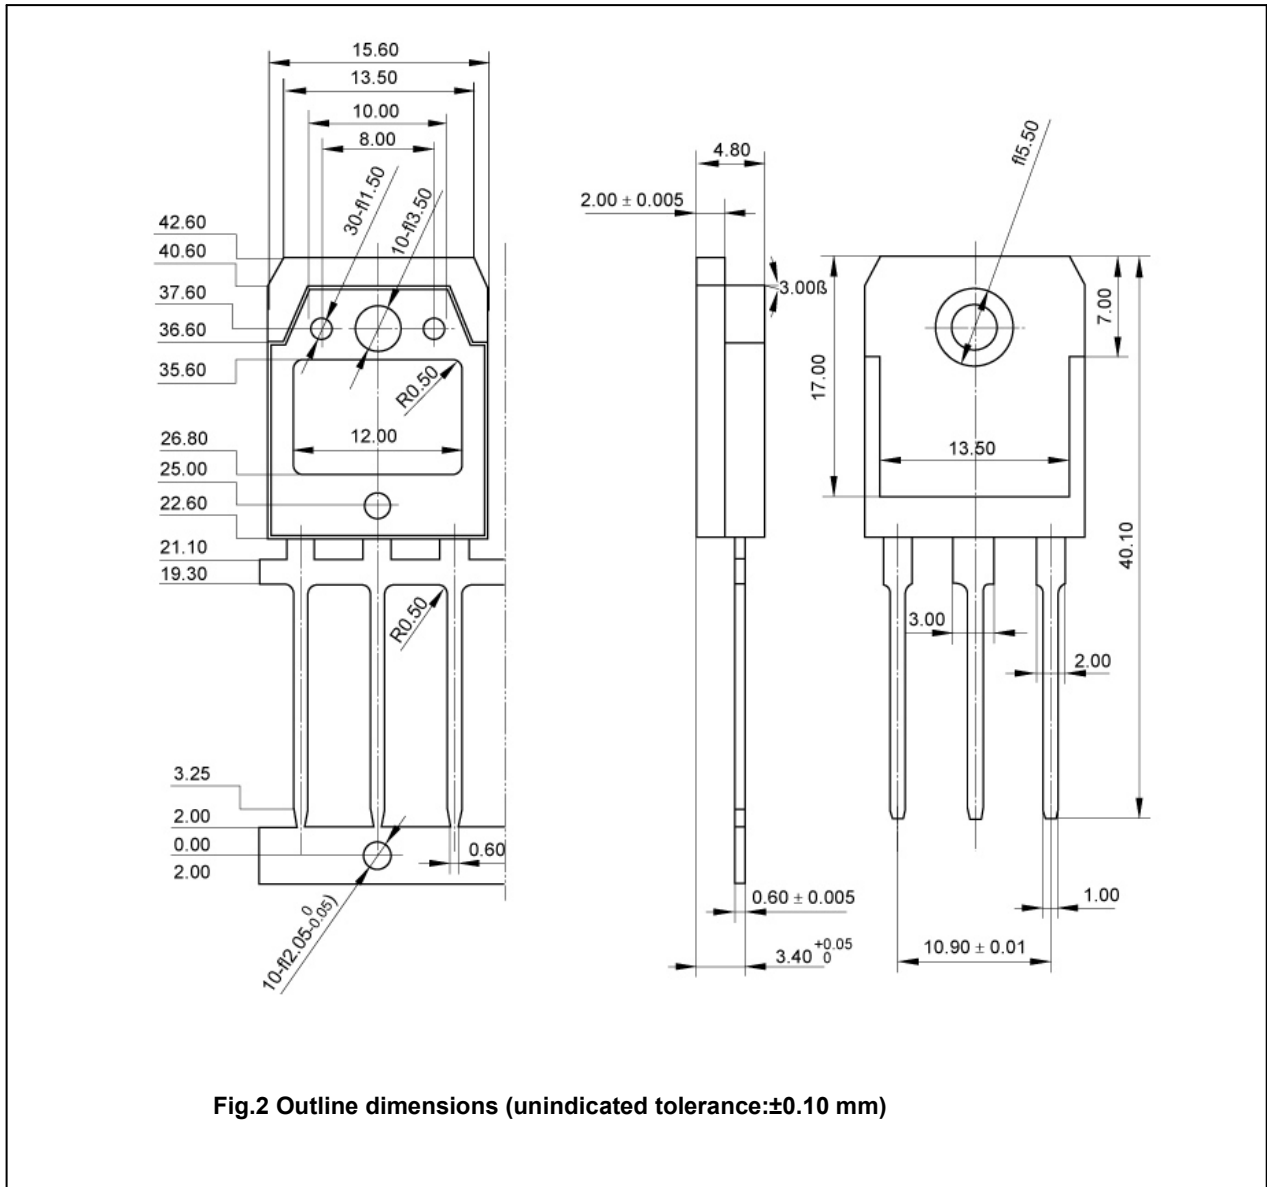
Outline dimensions (unindicated tolerance:  $\pm 0.10$  mm)
